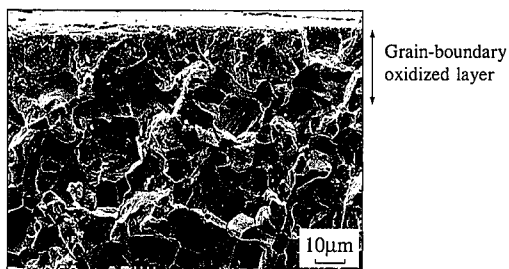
Bending fatigue crack initiation site in carburized specimen
